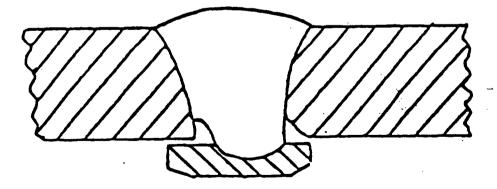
UNACCEPTABLE WELD JOINT
